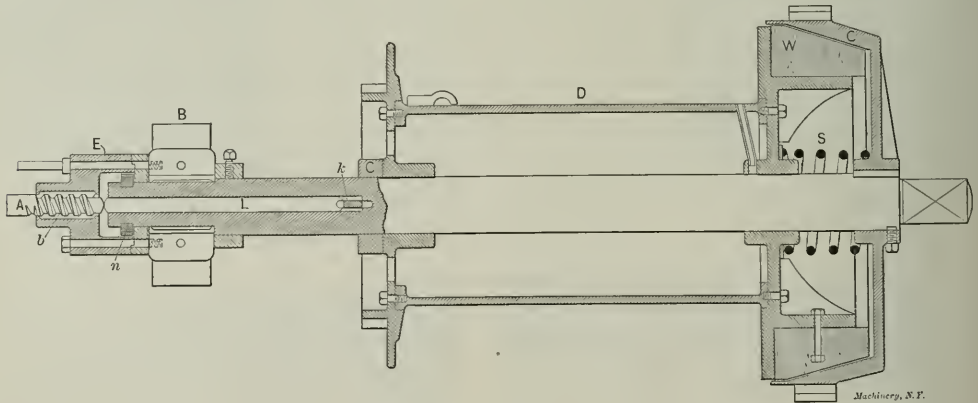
Cone Friction Coupling Applied to Spool of Hoisting Machine.
